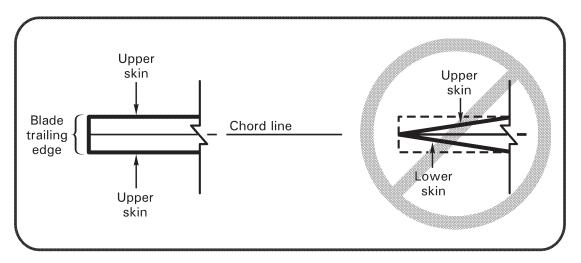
FILING EDGES SQUARE WITH SKINS
